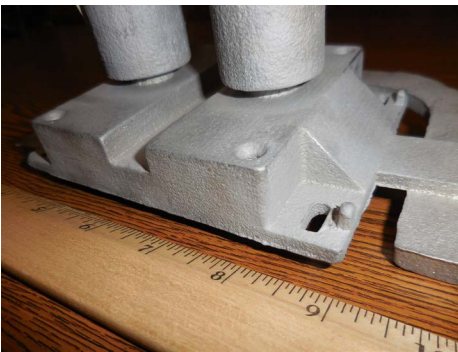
Cast Aluminum A356 Part Using a 3-D Printed Mold With OEM Sand (Source: ARL).
